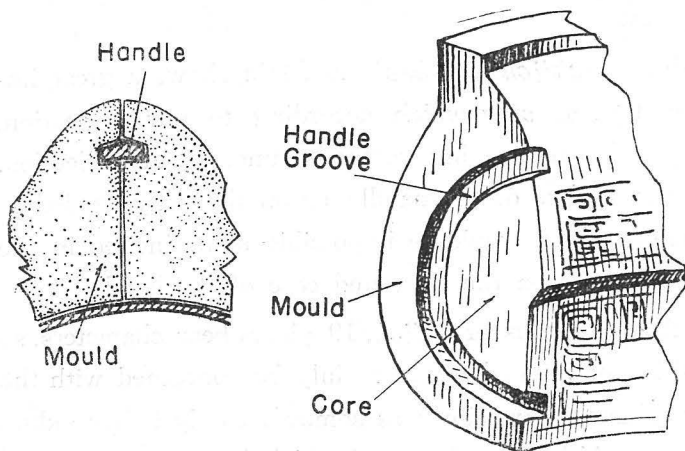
, Bi-valve mould assembly for the handle of *chia* R2039 (Hsiao-t'un tomb 232).
